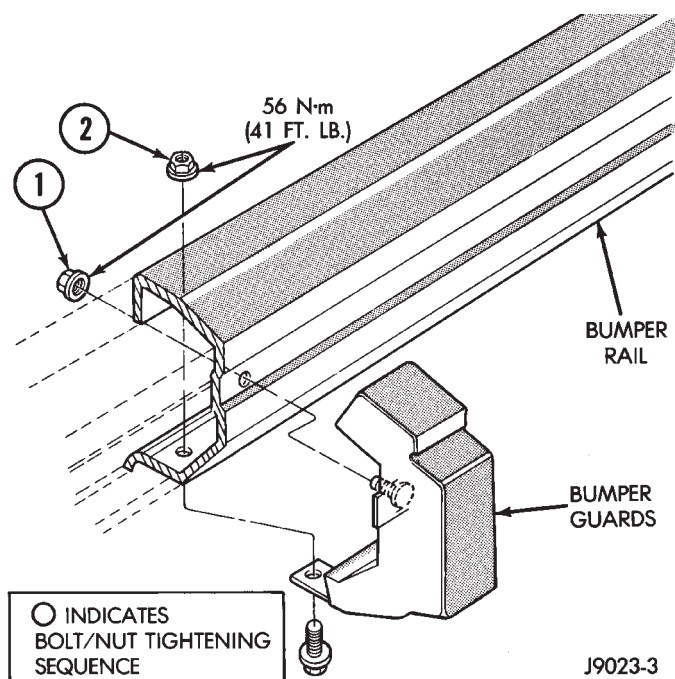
Bumper Guard Removal/Installation—XJ Vehicles
